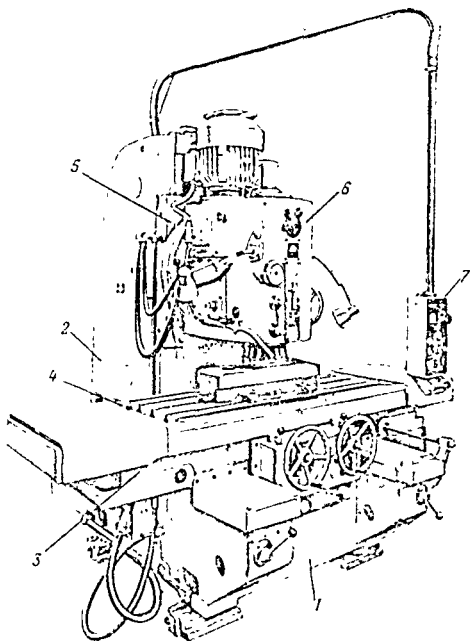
Vertical-spindle compound-table milling machine, model 654
